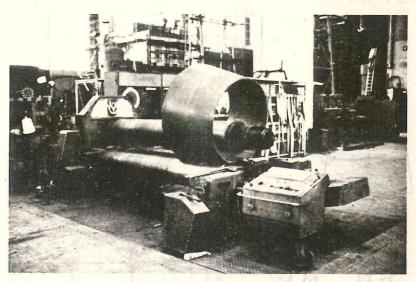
Furnace side plate of Type AQ3 boiler undergoing rolling operation (Note the collapsible end housing of plate rolls to enable the rolled plate to be withdrawn)
